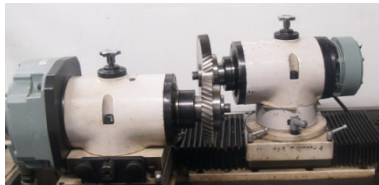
Tooth Bearing Test of Conical Involute Gears
